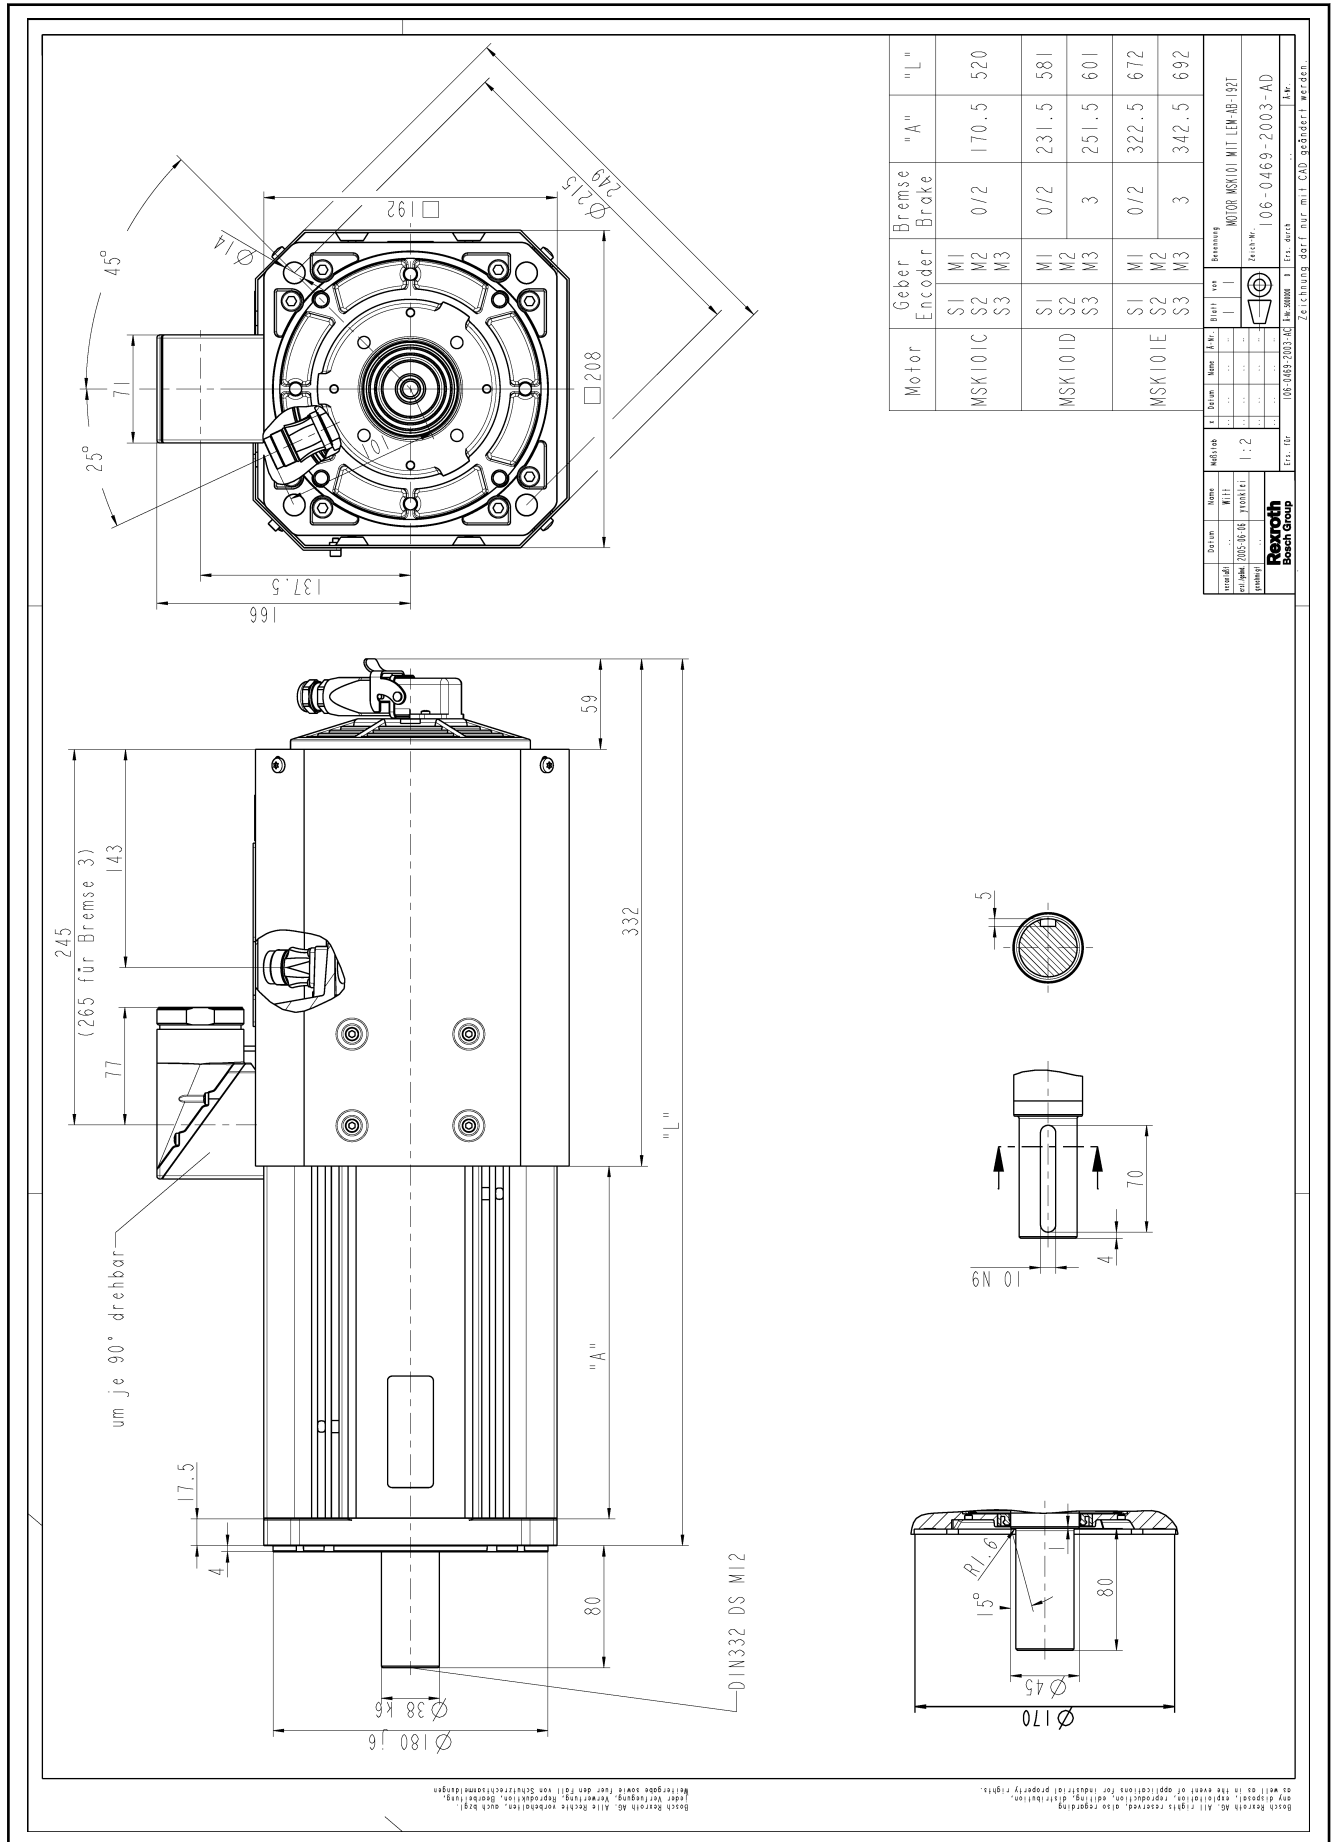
Dimension sheet MSK101 with axial fan unit
